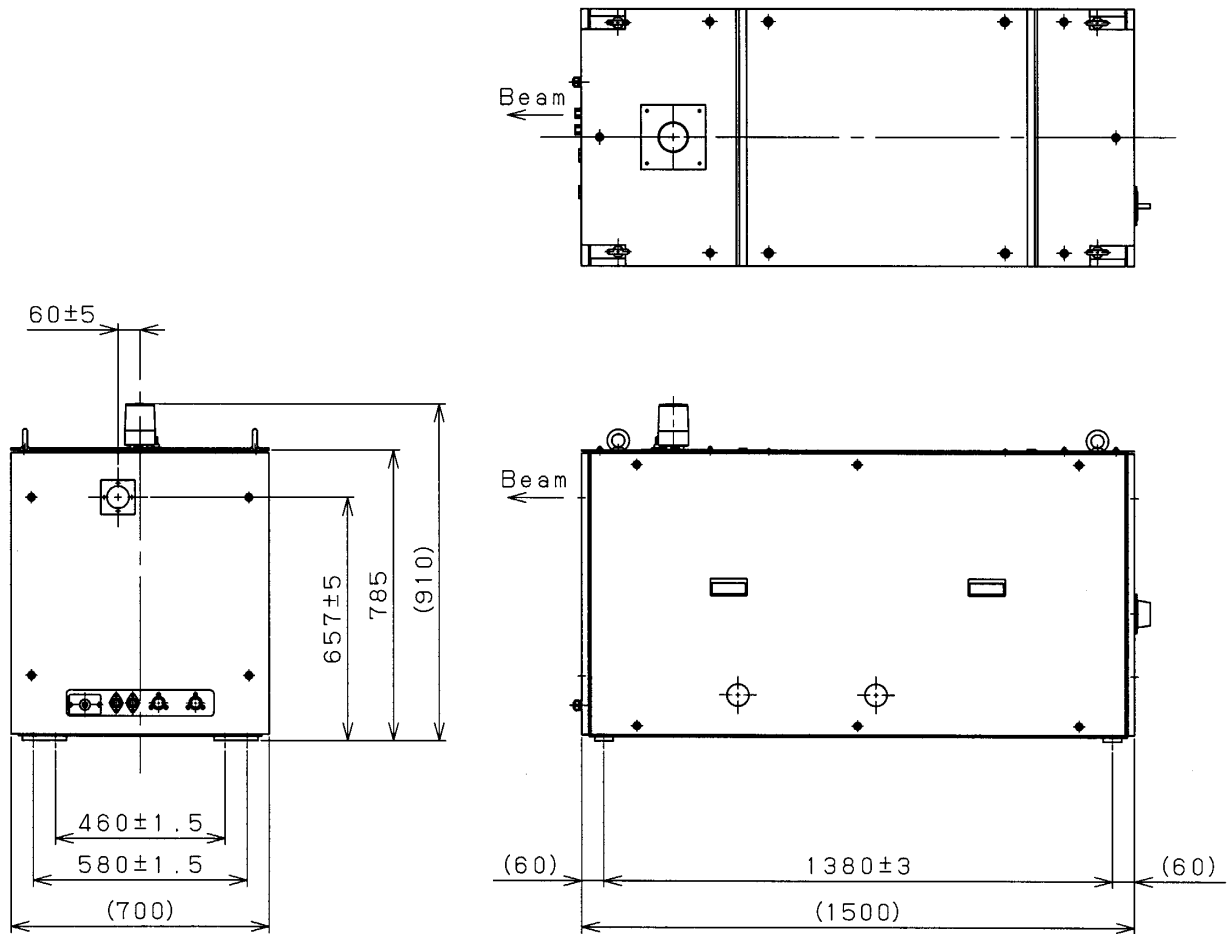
Fig. A EXTERNAL VIEW OF LASER OSCILLATOR
